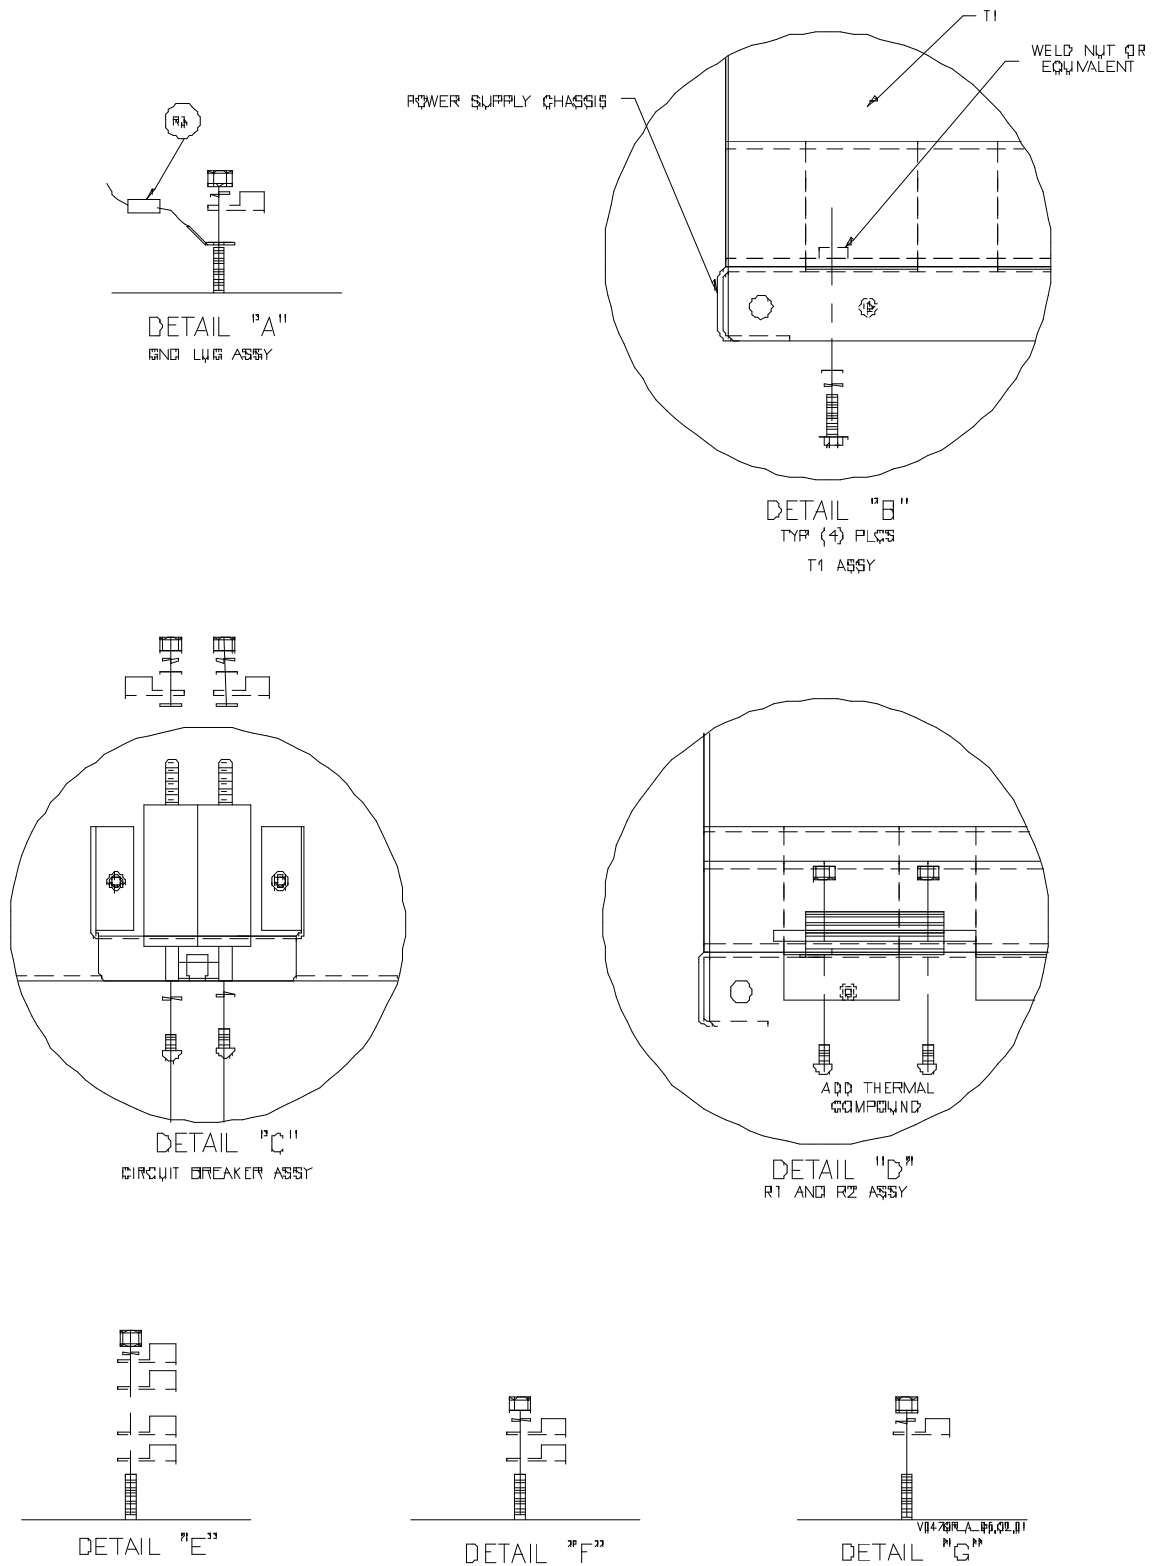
Gold Line 50A Power Supply Assembly 265-0082-012
